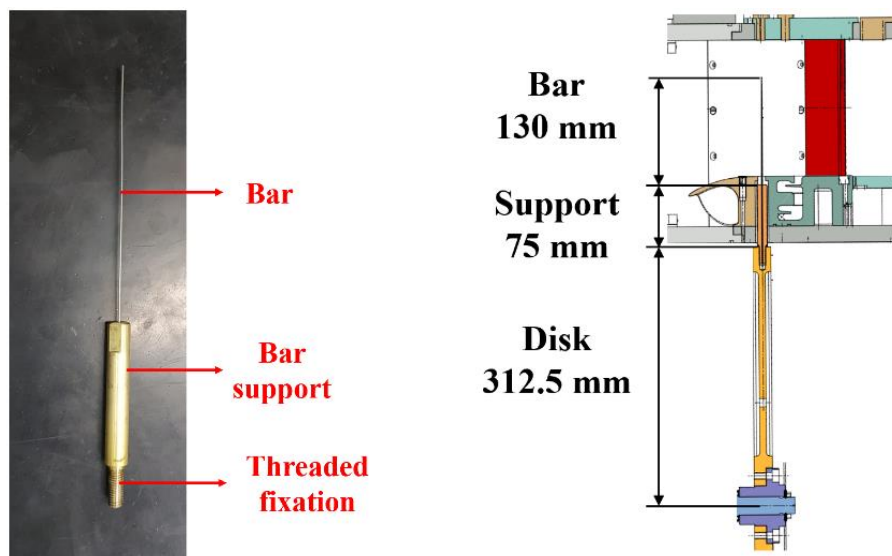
Bar-support assembly (left), full rotating assembly (disk, support and bar) dimensions in the test section (right)
